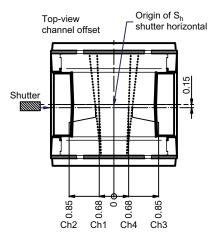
Top View Sensor, Channel Positions and Origin of Horizontal Shutter, tolerances \pm 0.2 mm
